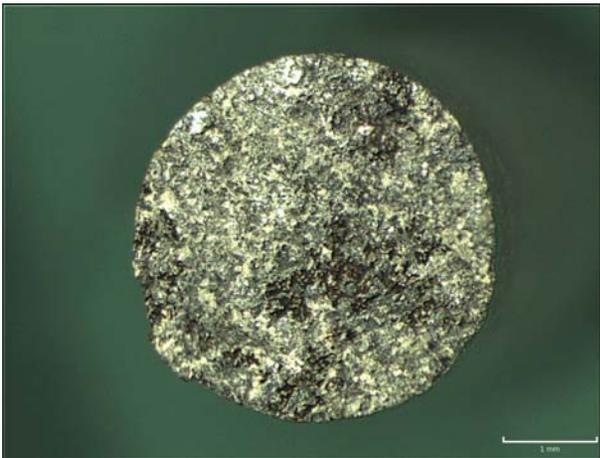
Macrostructure of tested sample, 6 mm/min, 18°C
